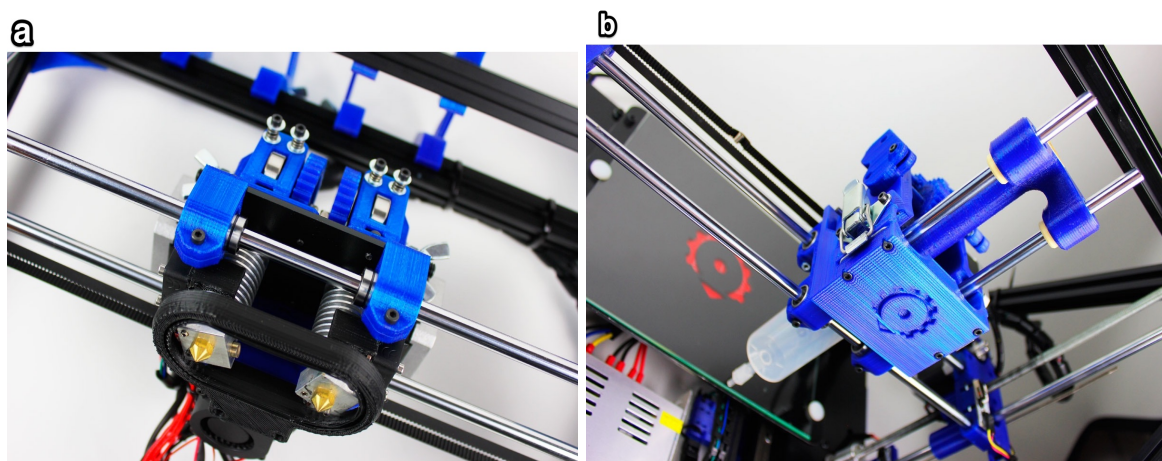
BCN3D+ printer with extruder and syringe tool end effectors [12]
